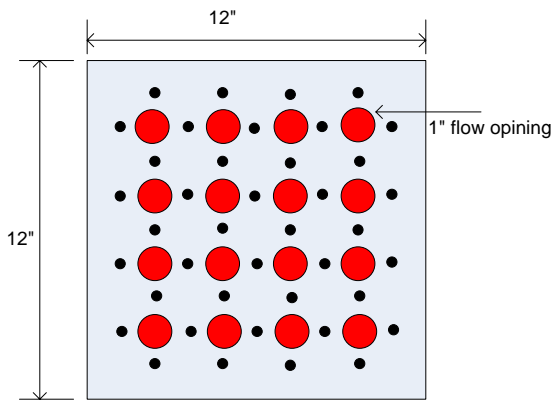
b: Top view of the Lower Plate with 25.4 mm (1") Flow Opening Holes and 6 mm (1/4") Pins Holes
